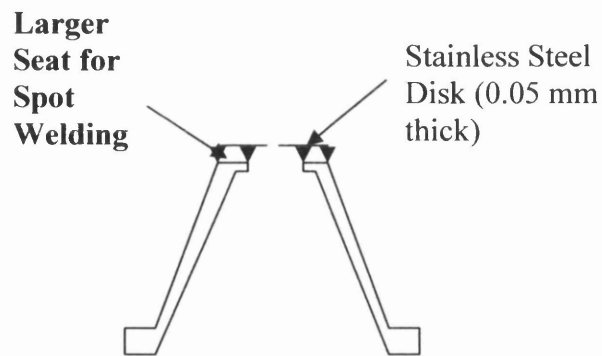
Redesigned front cone allowing easier spot welding (approximately 1:2))
